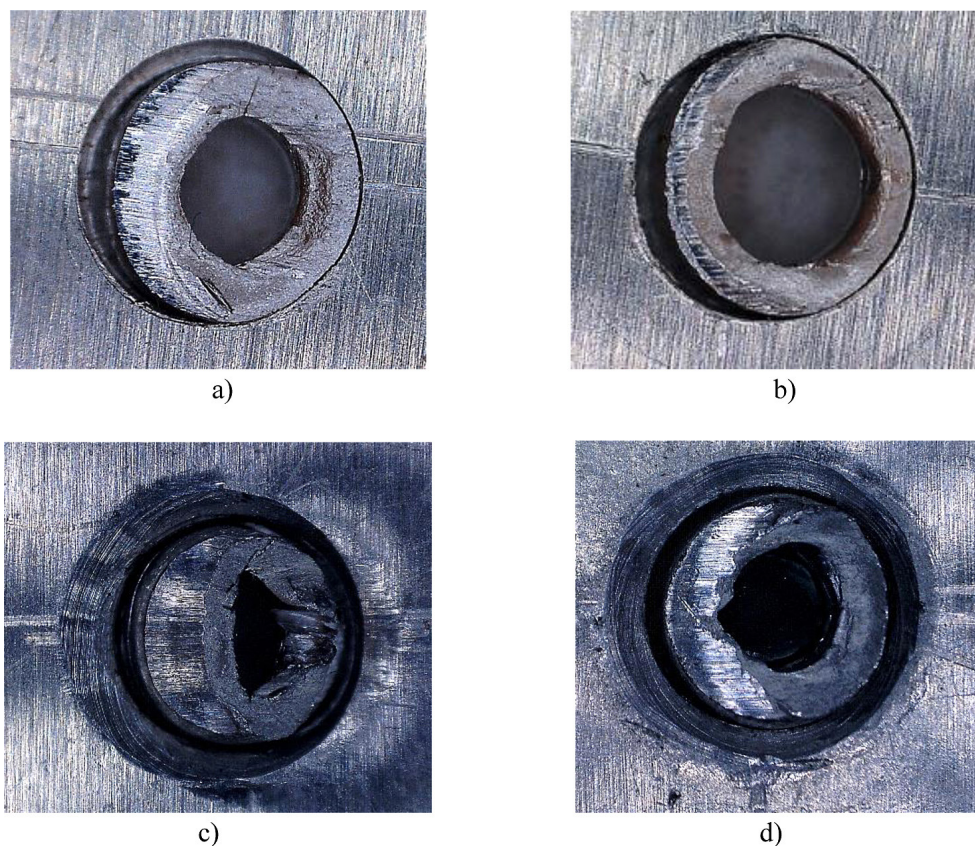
View of damaged rivet in joint: with 0 mm chamfer (a, b) and with 0.5 mm chamfer (c, d)
